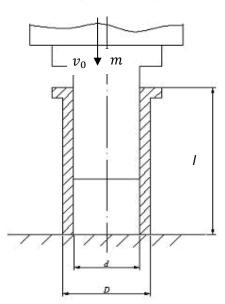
Design scheme of the shaking mechanism with a hard impact
